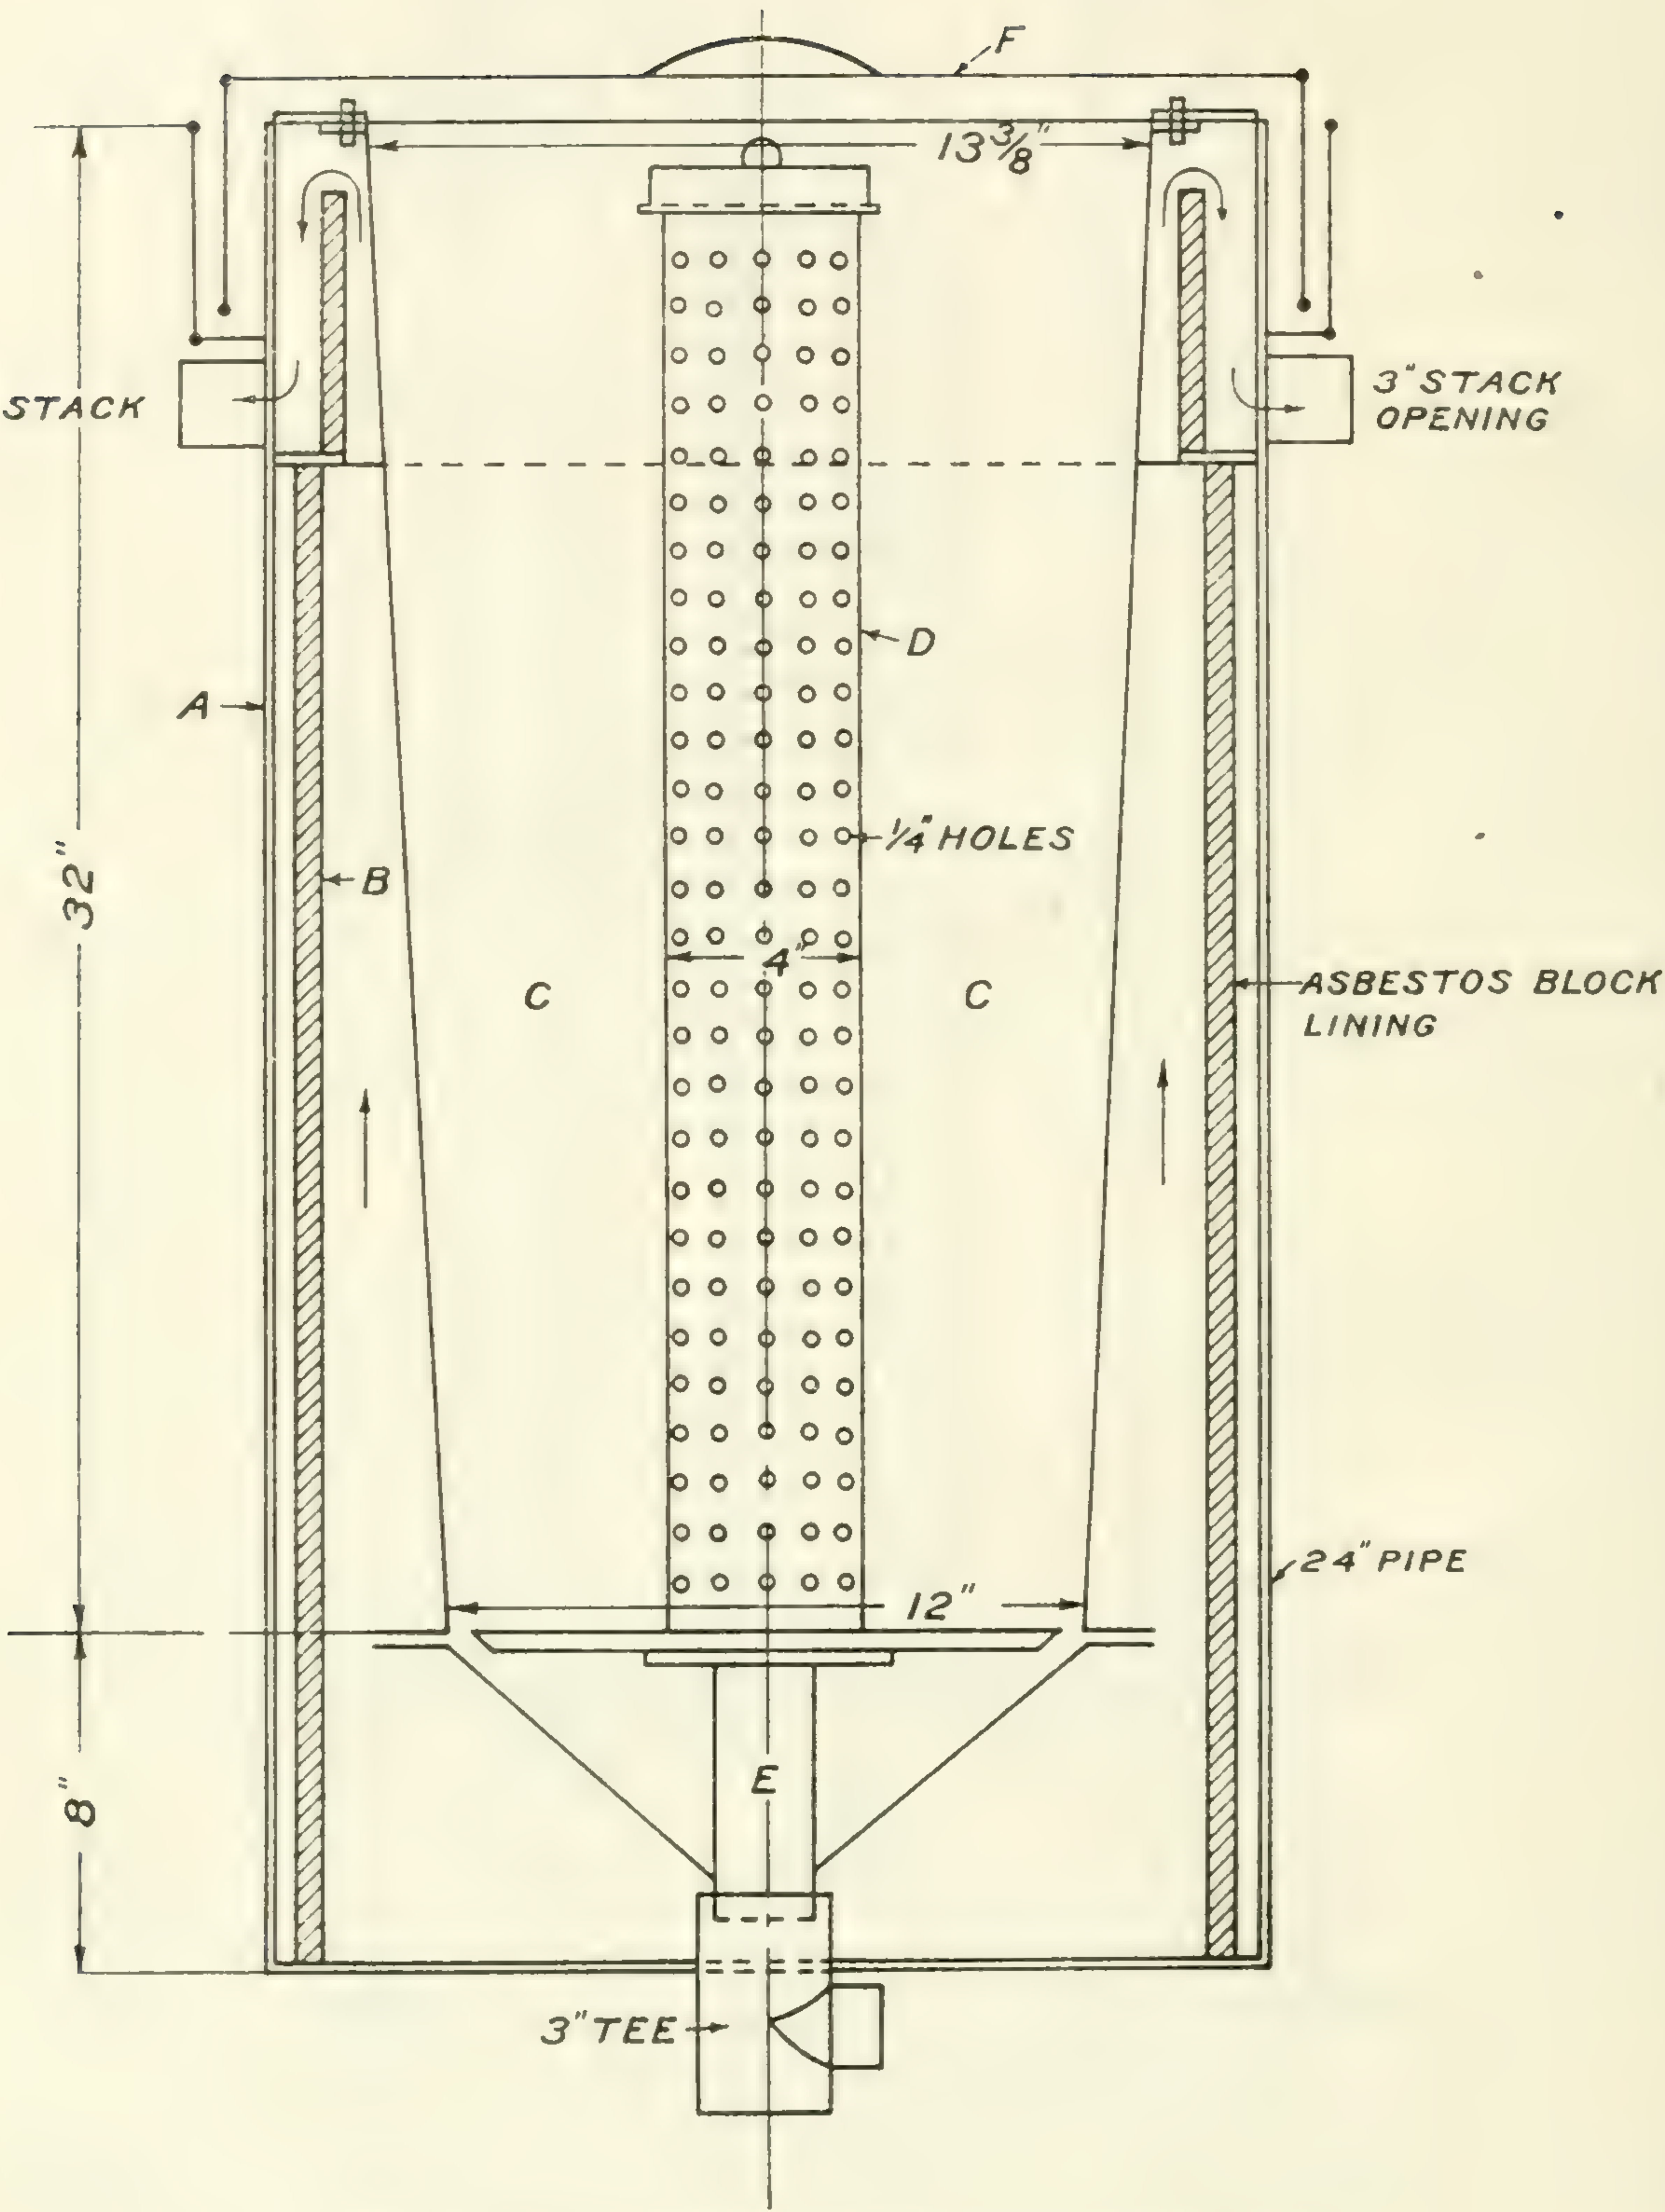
Detail of Wallace retort capacity 90 lb. coal.
